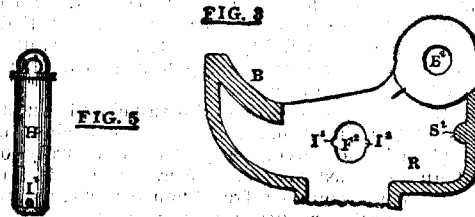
is a horizontal section, showing lower half of draw-head separate from coupling knuckle. Fig 5 is a side view of locking pin.
